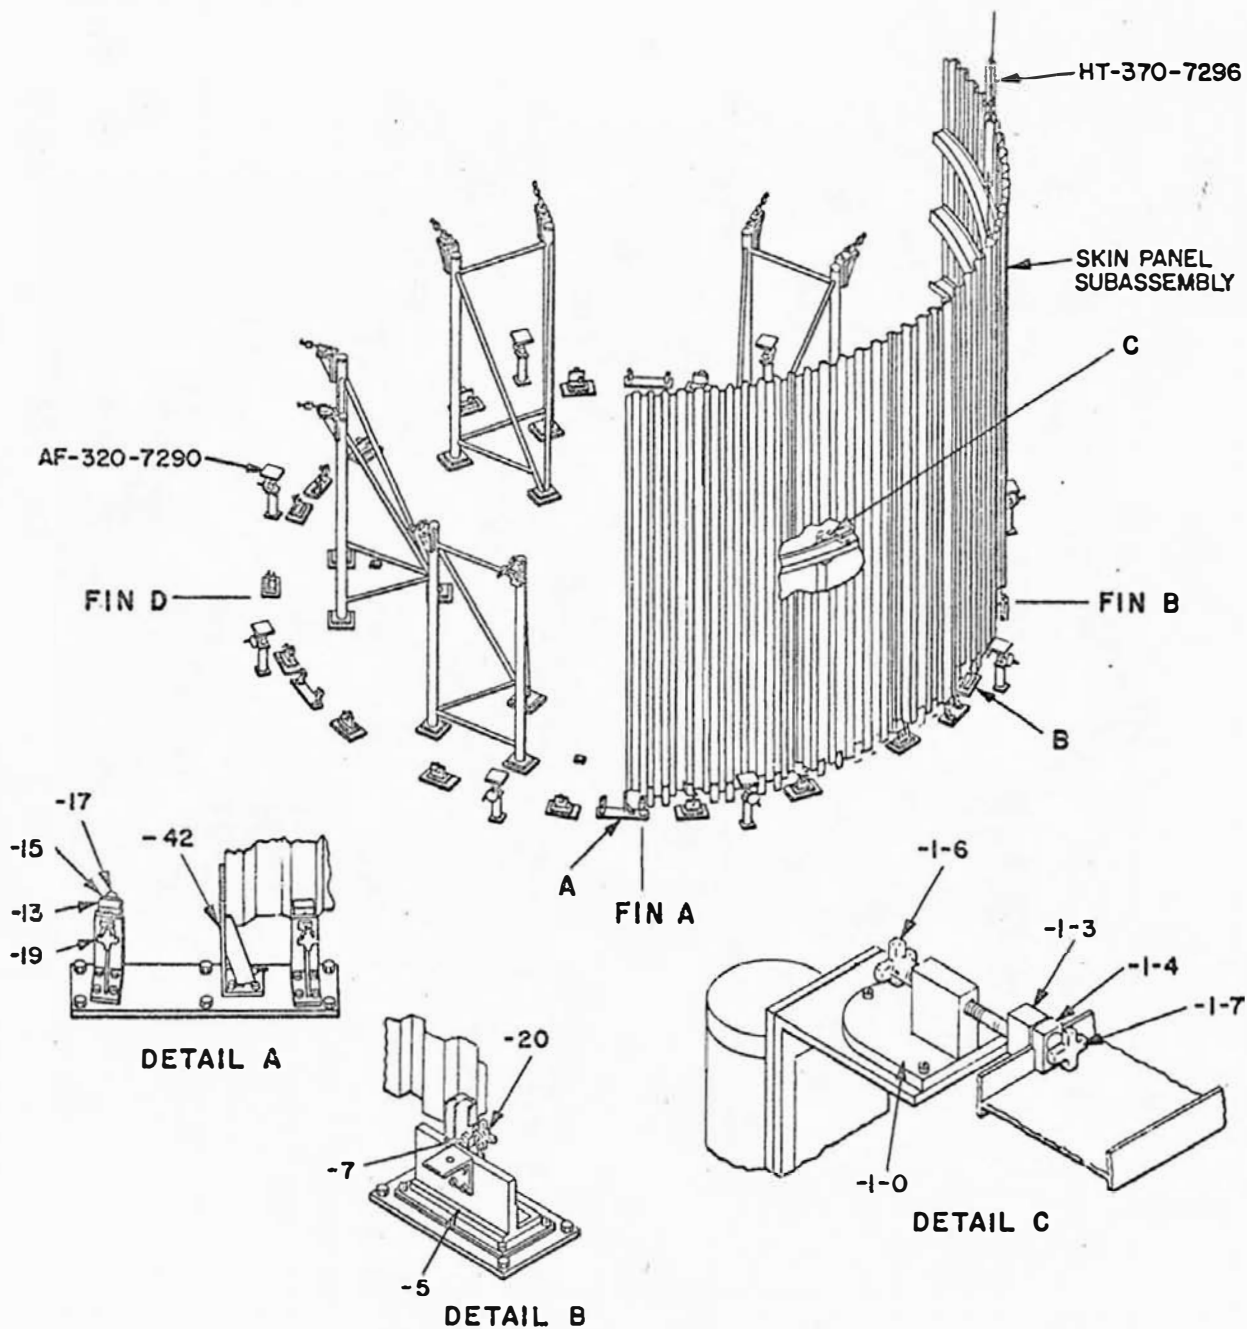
Installing Skin Panel Subassemblies on Assembly Fixture AF-320-7290
